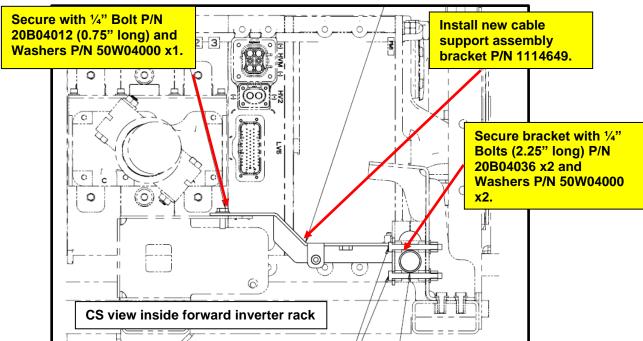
Install new cable support assembly bracket insider forward inverter rack
